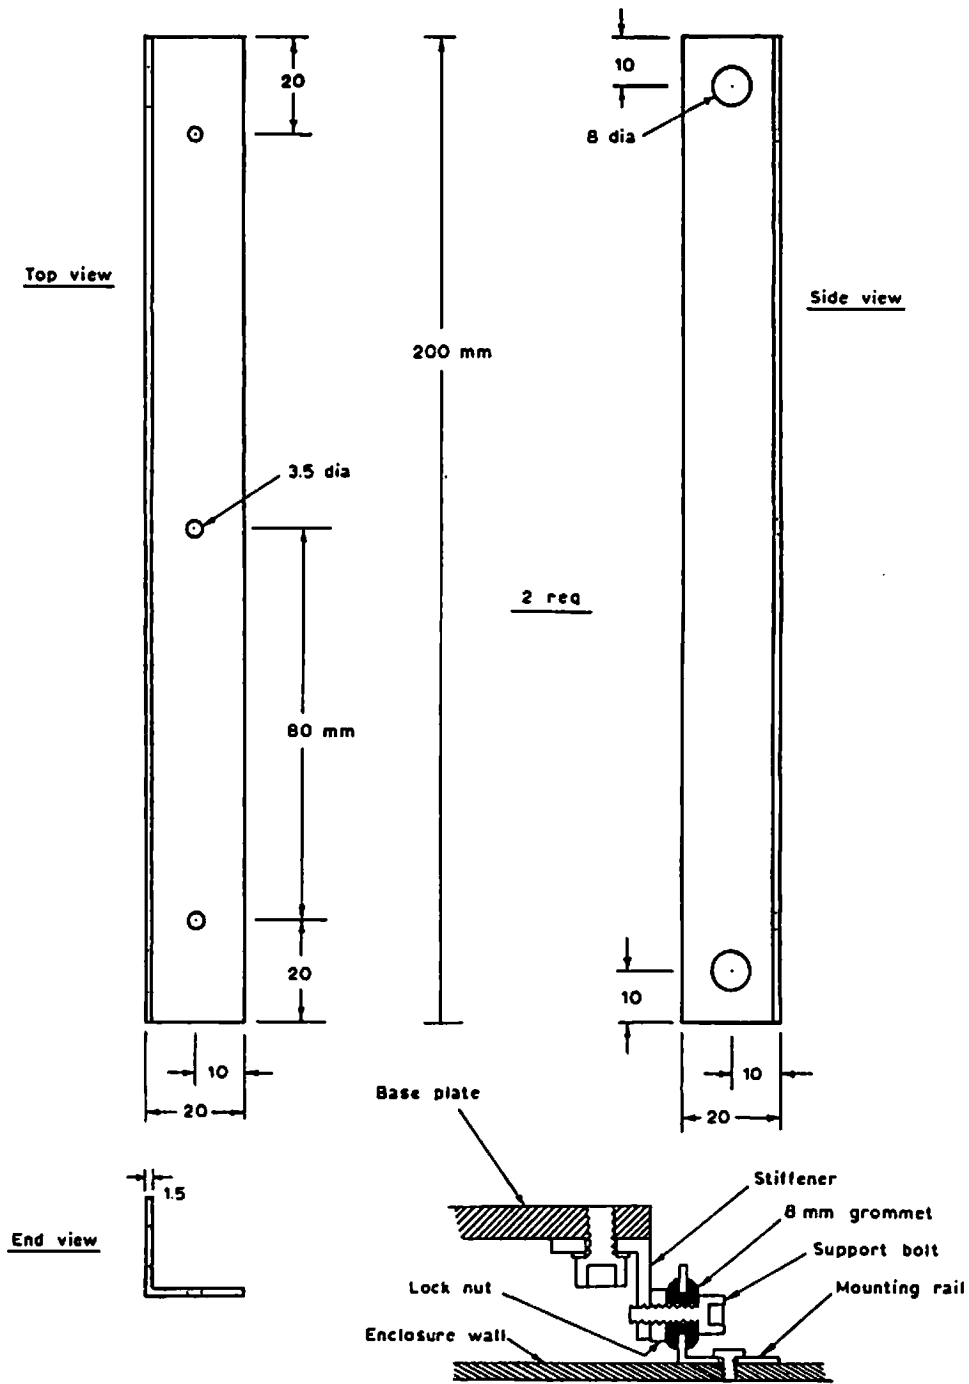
Mounting rails for optocoupler base, and details of the shock-absorbing mount system.
